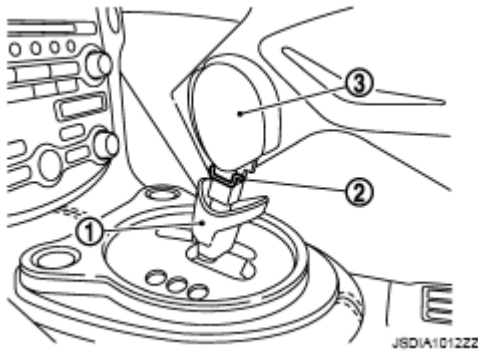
Identifying Knob Cover, Lock Pin And Selector Lever Knob
